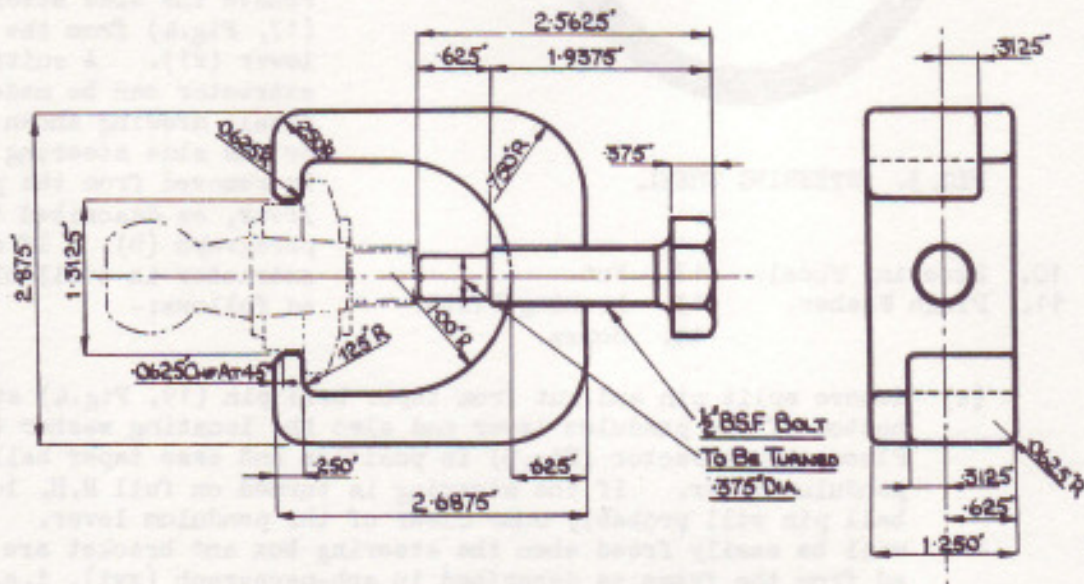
DETAILS OF EXTRACTOR - PENDULUM LEVER BALL PIN.
